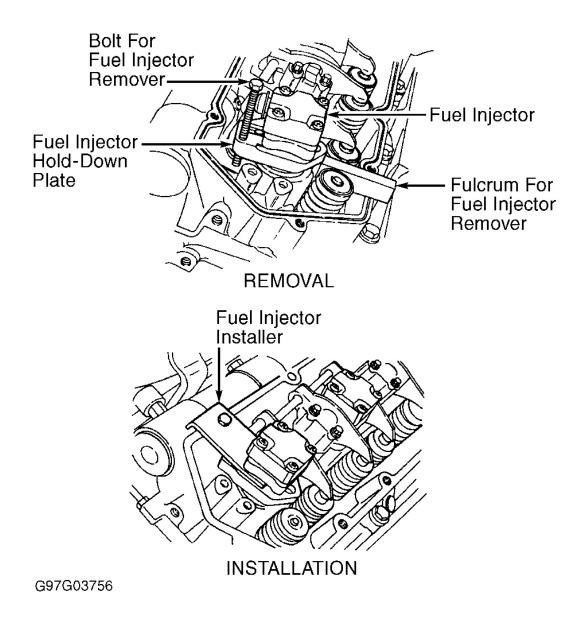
Removing & Installing Fuel Injector Courtesy of FORD MOTOR CO.
